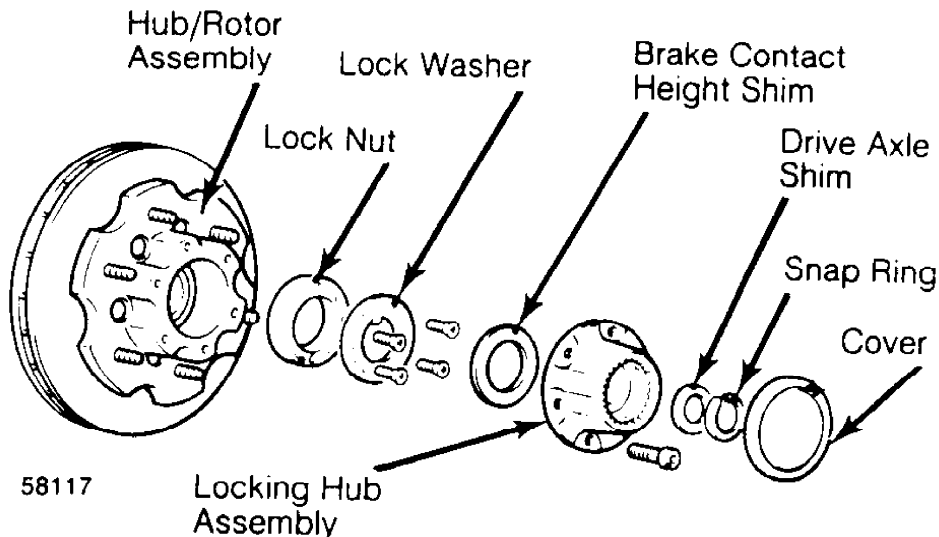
Exploded View Of Automatic Locking Hub (Typical)
